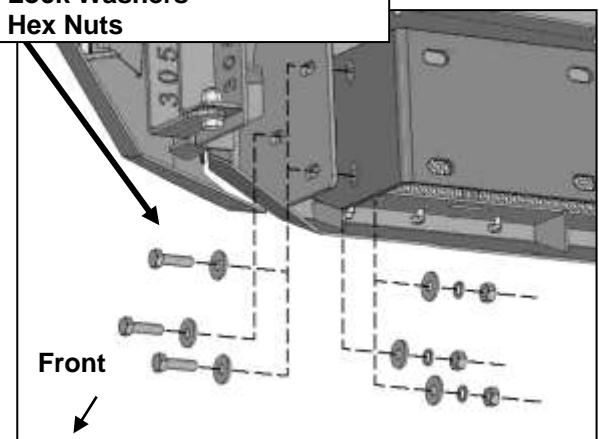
Attach Bumper assembly to Frame Brackets (Driver/left side pictured)
